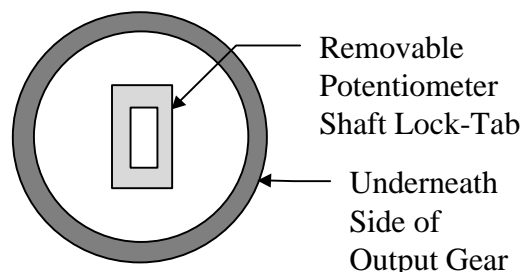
Illustration of the potentiometer shaft lock-tab inside the output gear.
